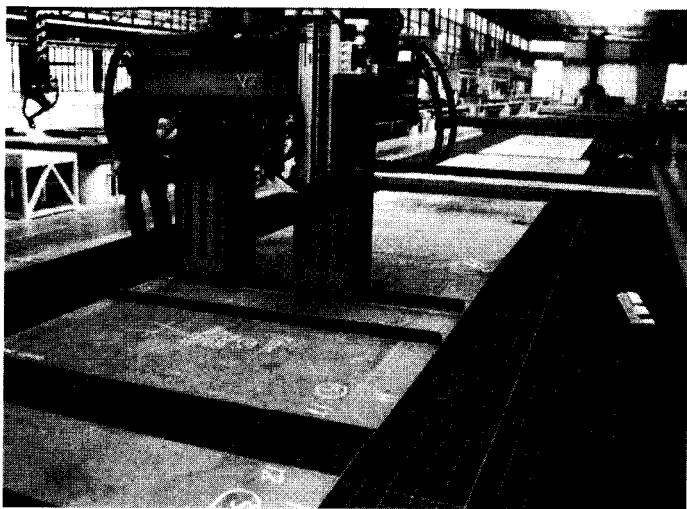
Robotic Stiffener Fitting and Tack Welding Workstation
